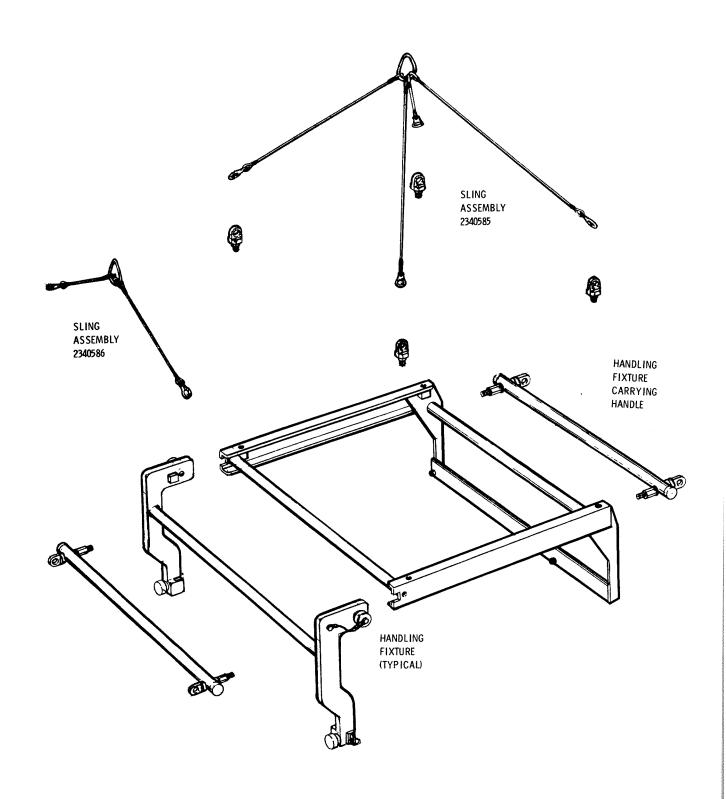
Assembly Handling GSE (Sheet 2 of 2)
